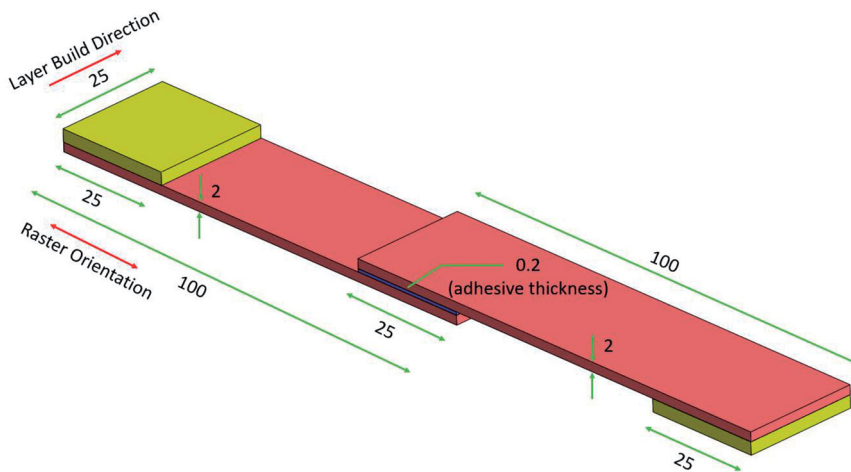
Structure of 3D-printed PLA adhesive single-lap joint for tensile and bending tests (all dimensions in mm).
